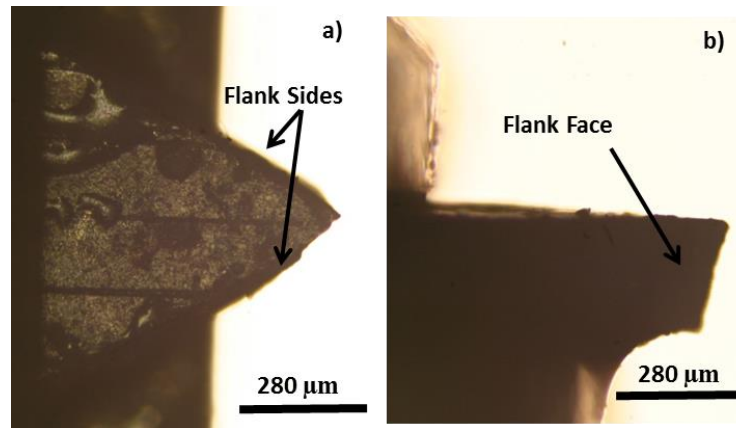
Zero Rake Flank Faces a) Top view and the two flank face edges, b) Side view and the flank face
